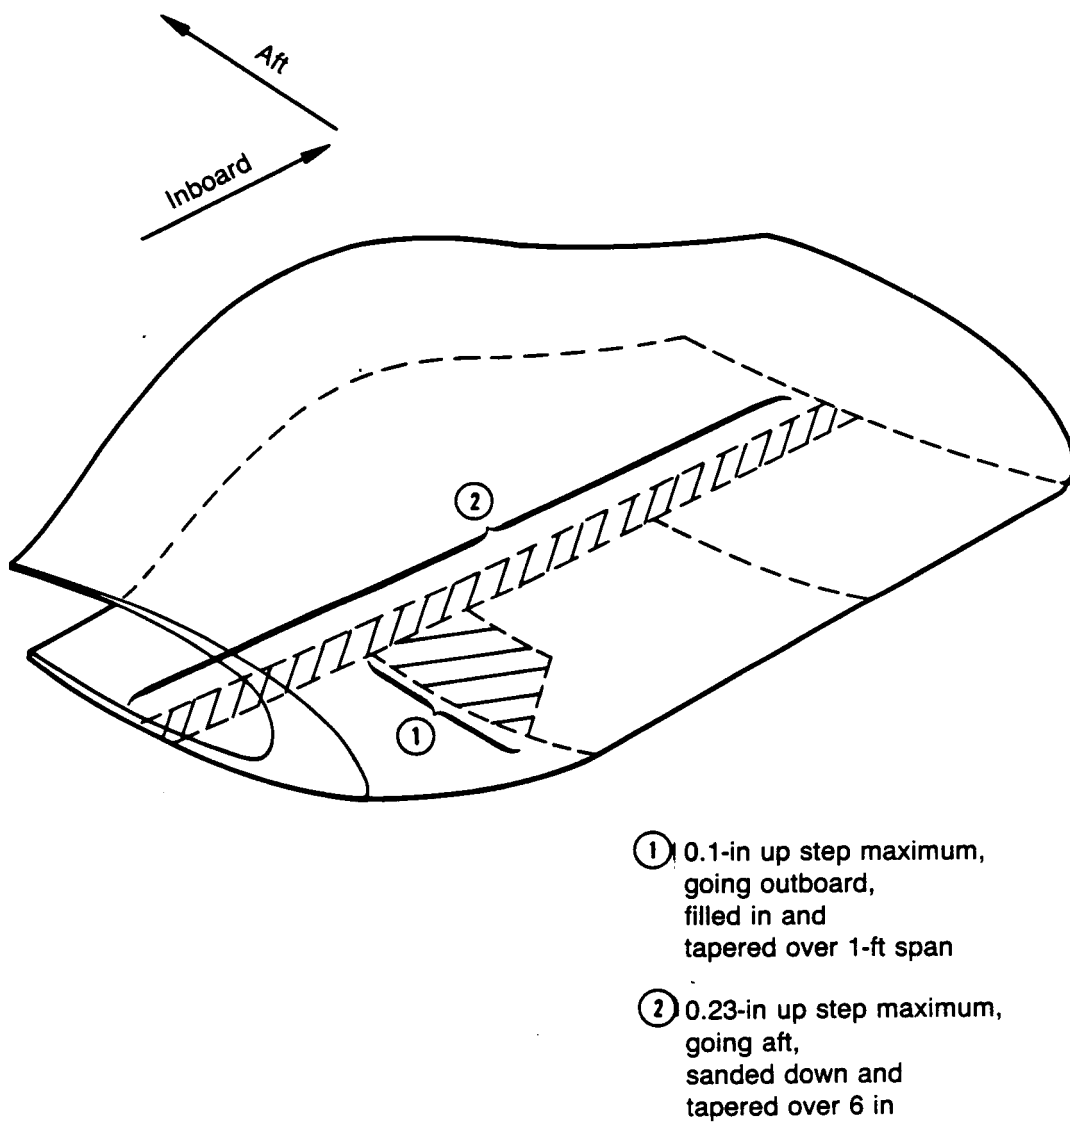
Assembly Mismatches for Glove Lower Surface
